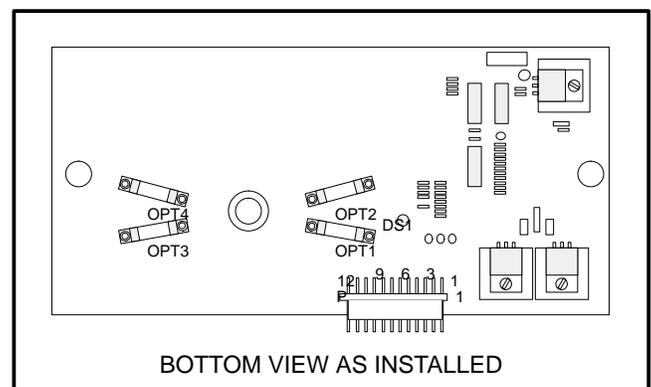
STEERING ANGLE CONTROL BOARD
